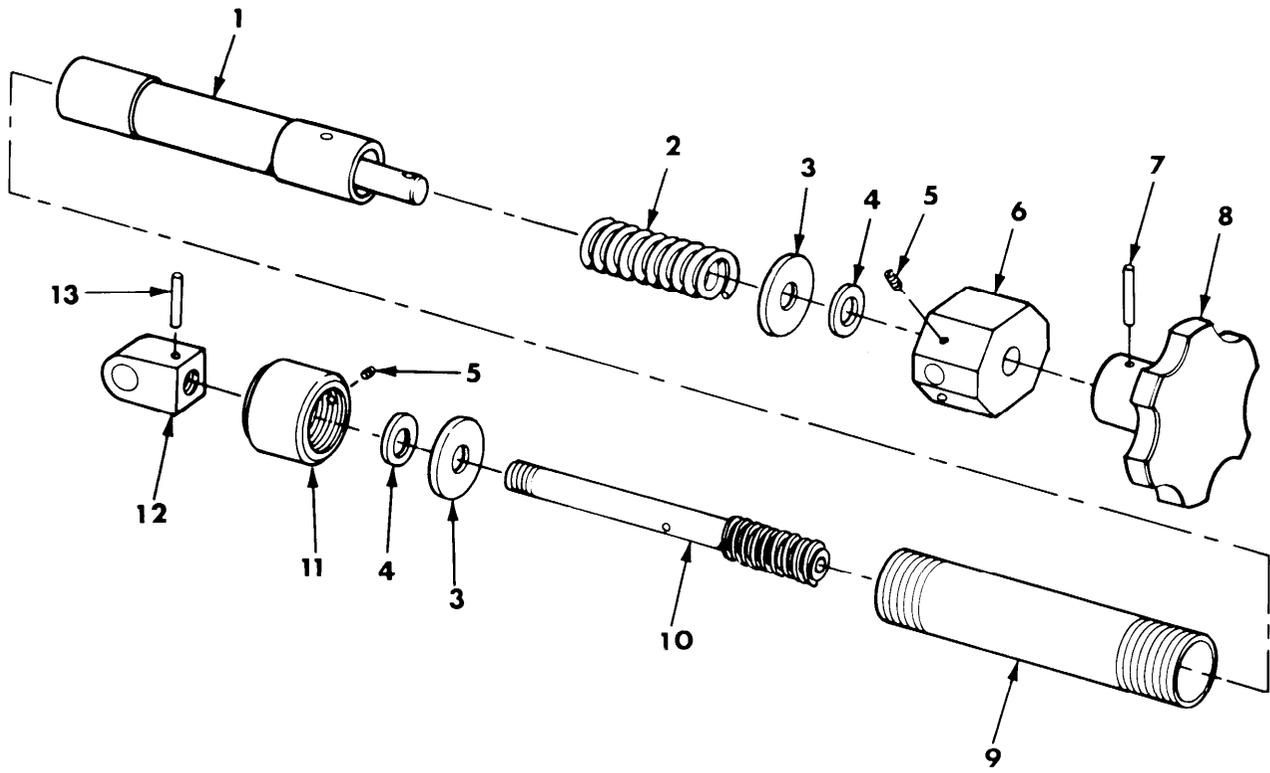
Leveling Mechanism 10918074 and Nut Assembly 10918082.
